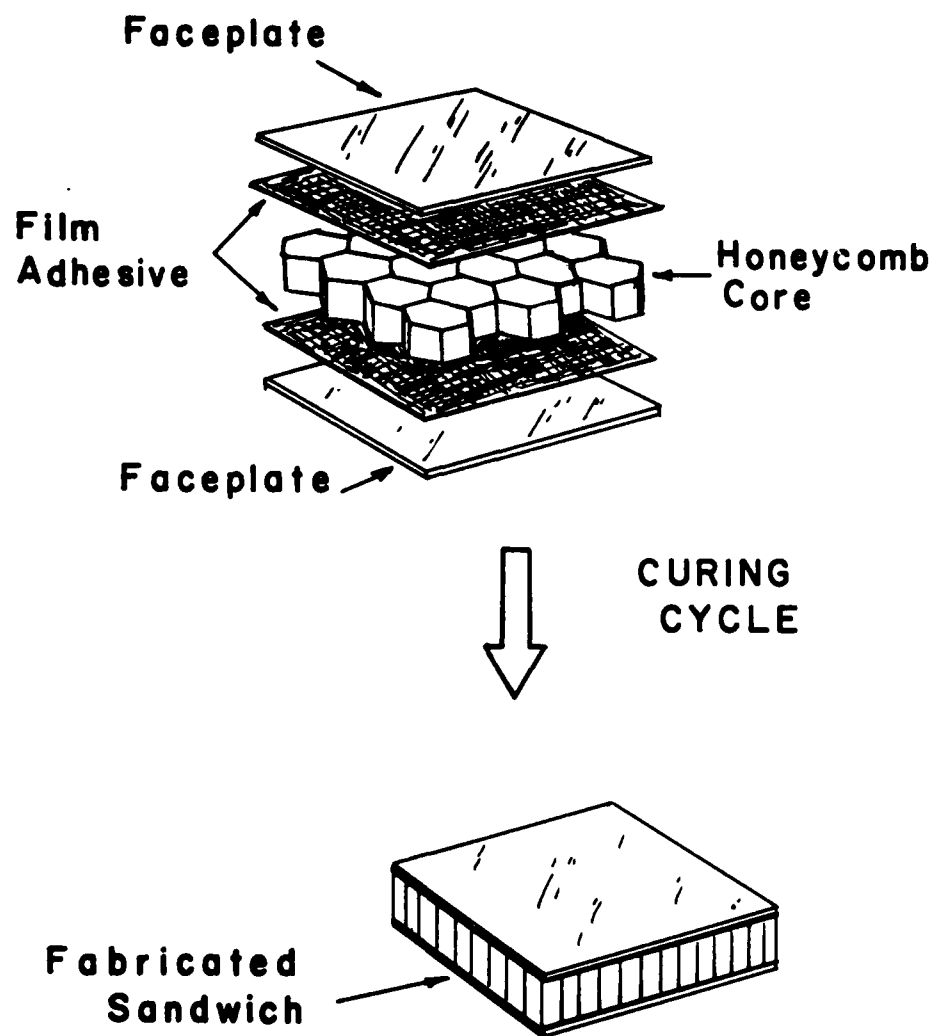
SANDWICH BEAM CONSTRUCTION
